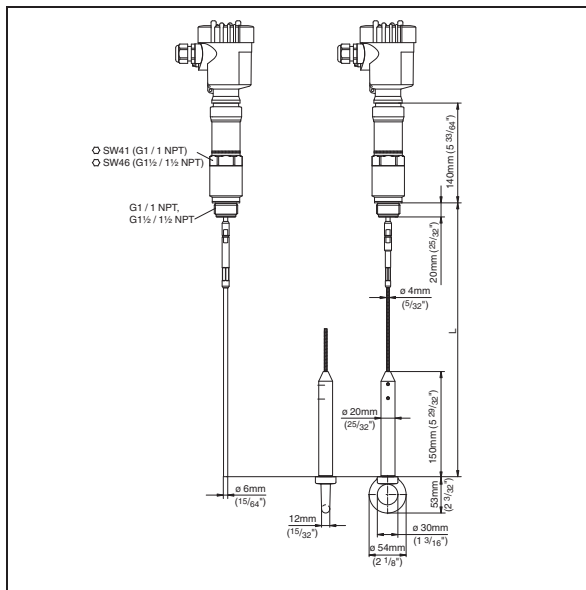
VEGAFLEX 66 - cable, rod version with thread (-20 ... +250 °C/-4 ... +482 °F)
